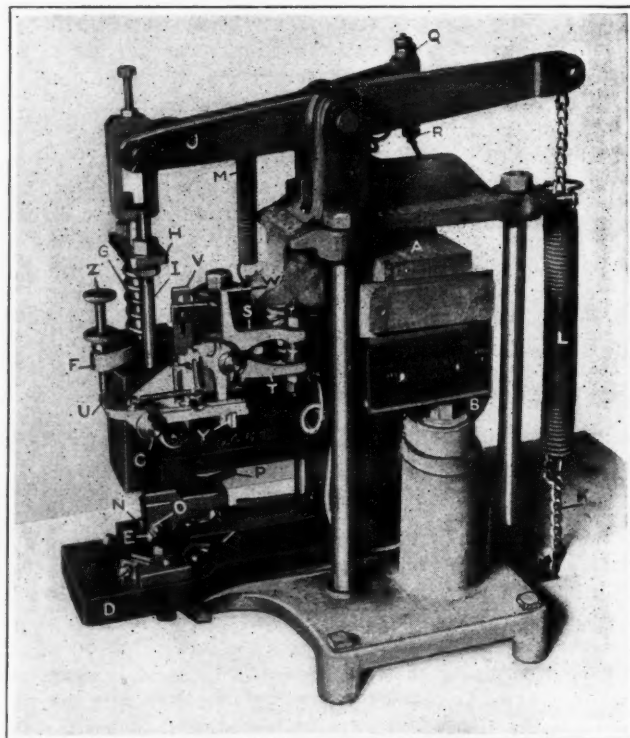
Special "Thomson" Electric Welding Machine built for welding Platinum Tips to Screws, etc.
